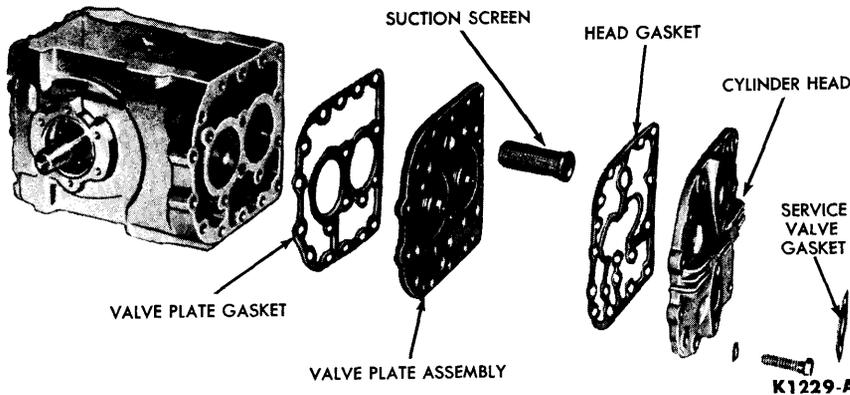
Tecumseh Cylinder Head and Valve Assembly
